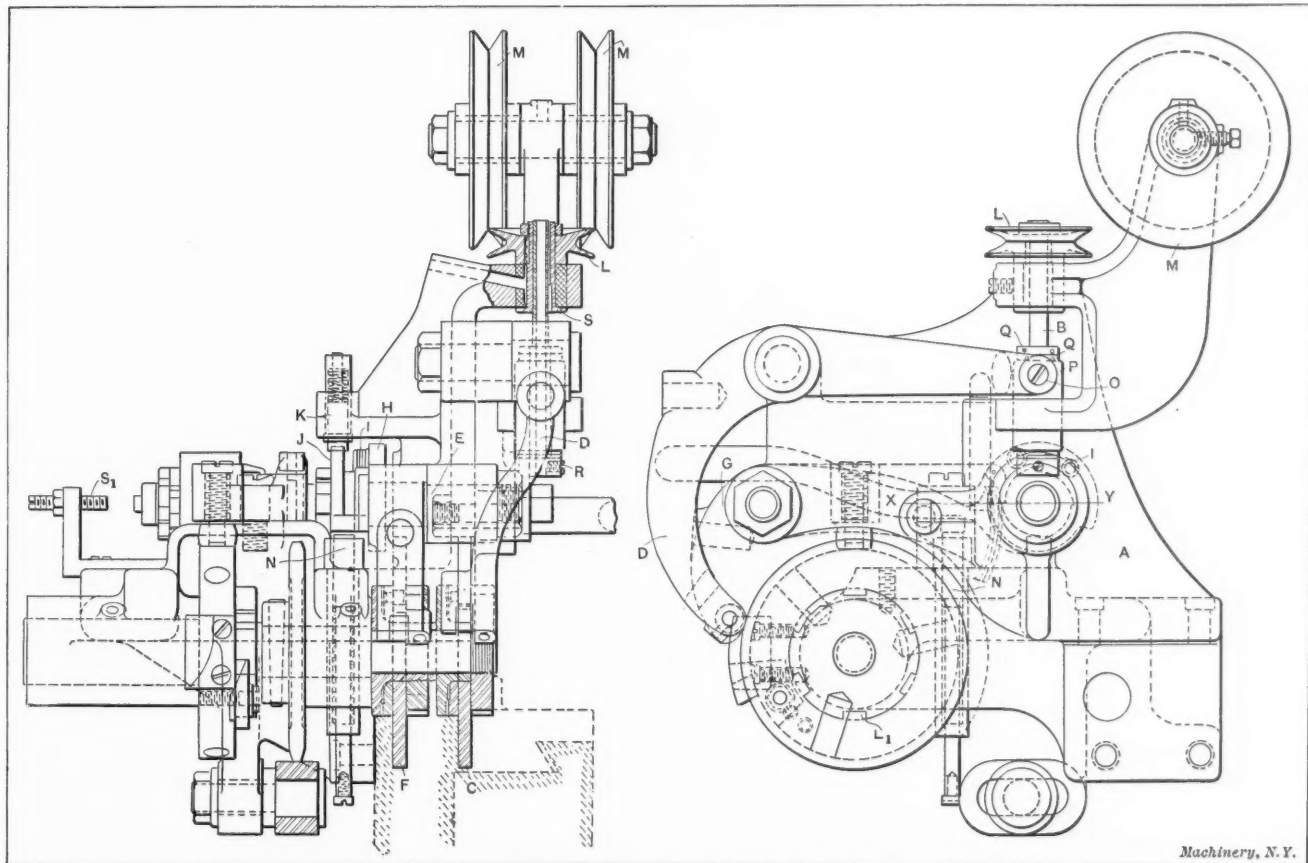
Assembly View of the Index Drilling Attachment for the No. 00 B. & S. Automatic Screw Machine
